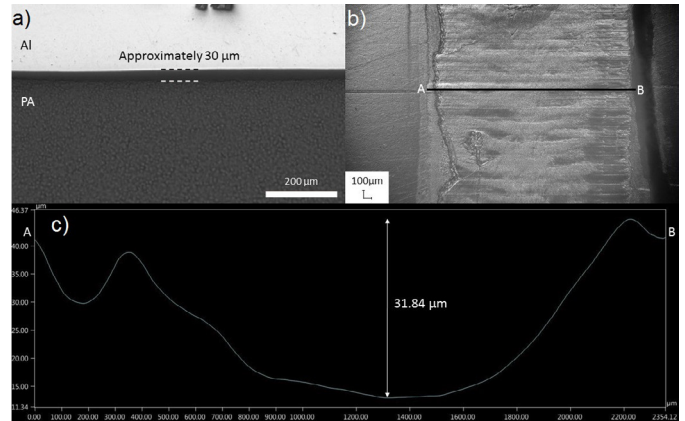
a) The cross-section of laser-polished Al sample welded to PA with 260W modulated power, b and c) Measurements of the removed layer from PA fracture surface after the tensile-shear test for a similar sample.
